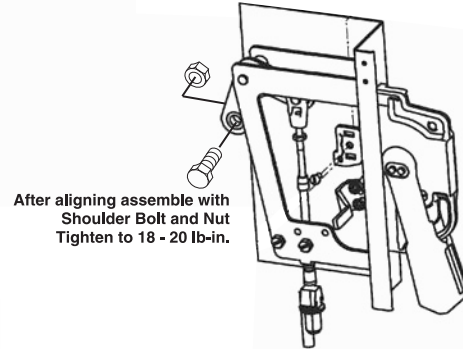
Assembly of Adapter Link to Bell Crank Using Shoulder Bolt
